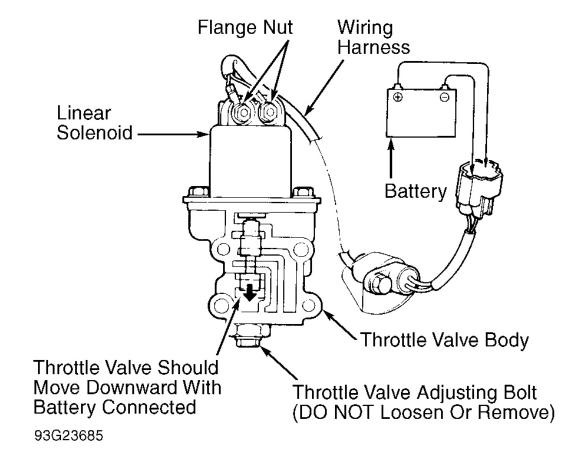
Checking Linear Solenoid Operation Courtesy of AMERICAN HONDA MOTOR CO., INC.
